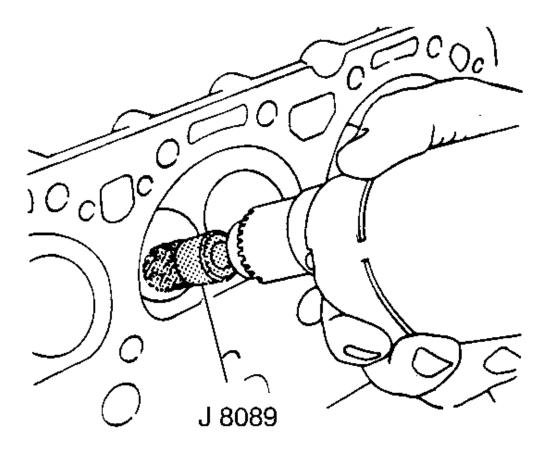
Cleaning Carbon From Combustion Chambers Using J 8089 Courtesy of GENERAL MOTORS CORP.
